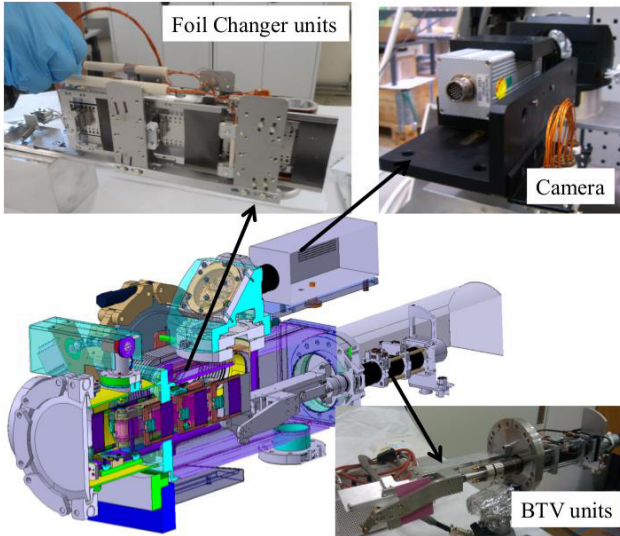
3D drawing of the stripping foil system with a detailed view of the foil loader (top-left), the radiation-hard camera (top-right) and the retractable screen (bottom-right).
